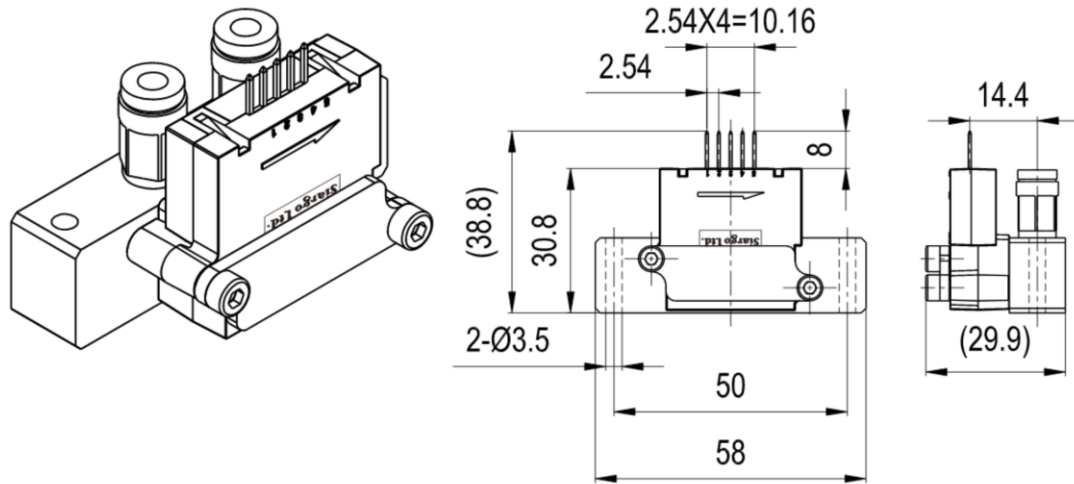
The mechanical dimensions for FS5001L with optional $\Phi 4$ mm one-touch connection block.
